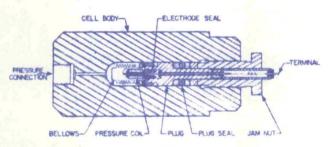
ASSEMBLY OF 150,000-PSI PRESSURE CELL
